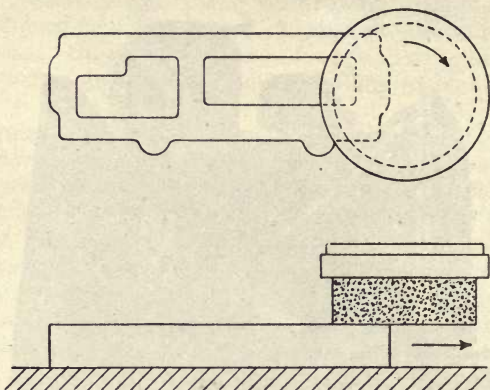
SURFACE GRINDING WITH CUP-WHEEL
